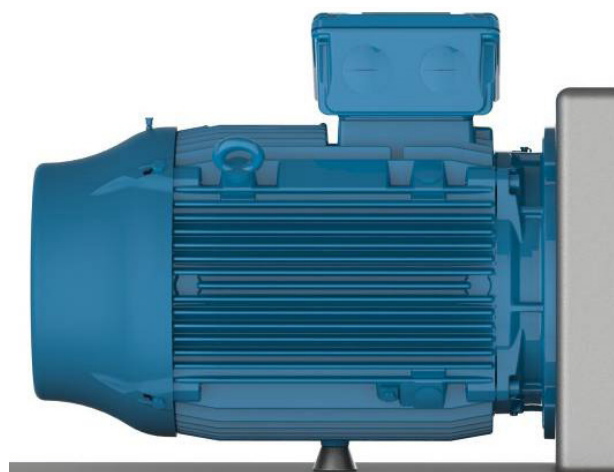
Mounting method of flange mounted motors with a frame base support
